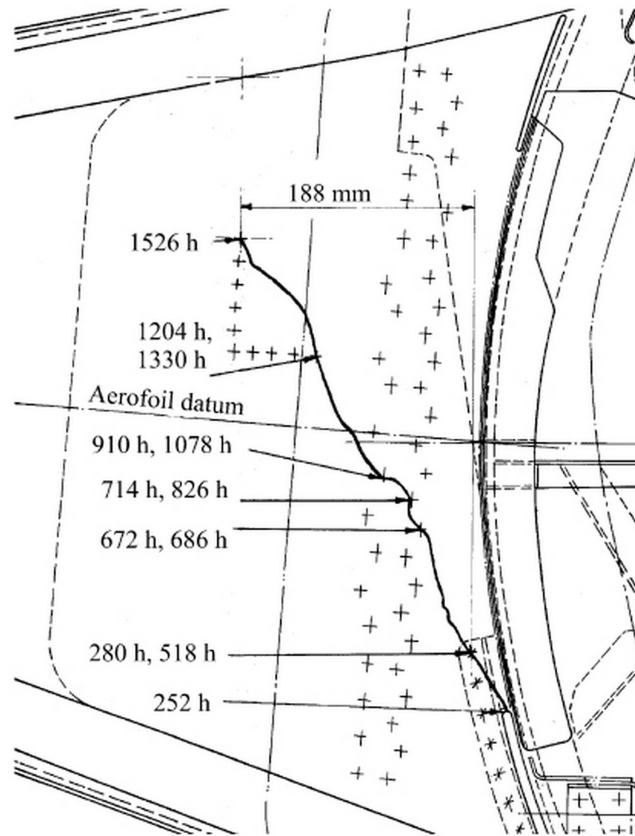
Fatigue crack path in a fighter aircraft centre section. In this case, the damage unit is flying hours instead of loading cycles [136].
